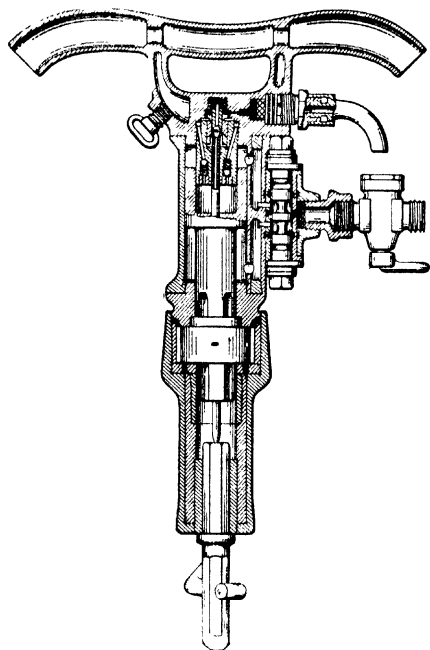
Sullivan "Water-Tube Rotator" (DP-33).
